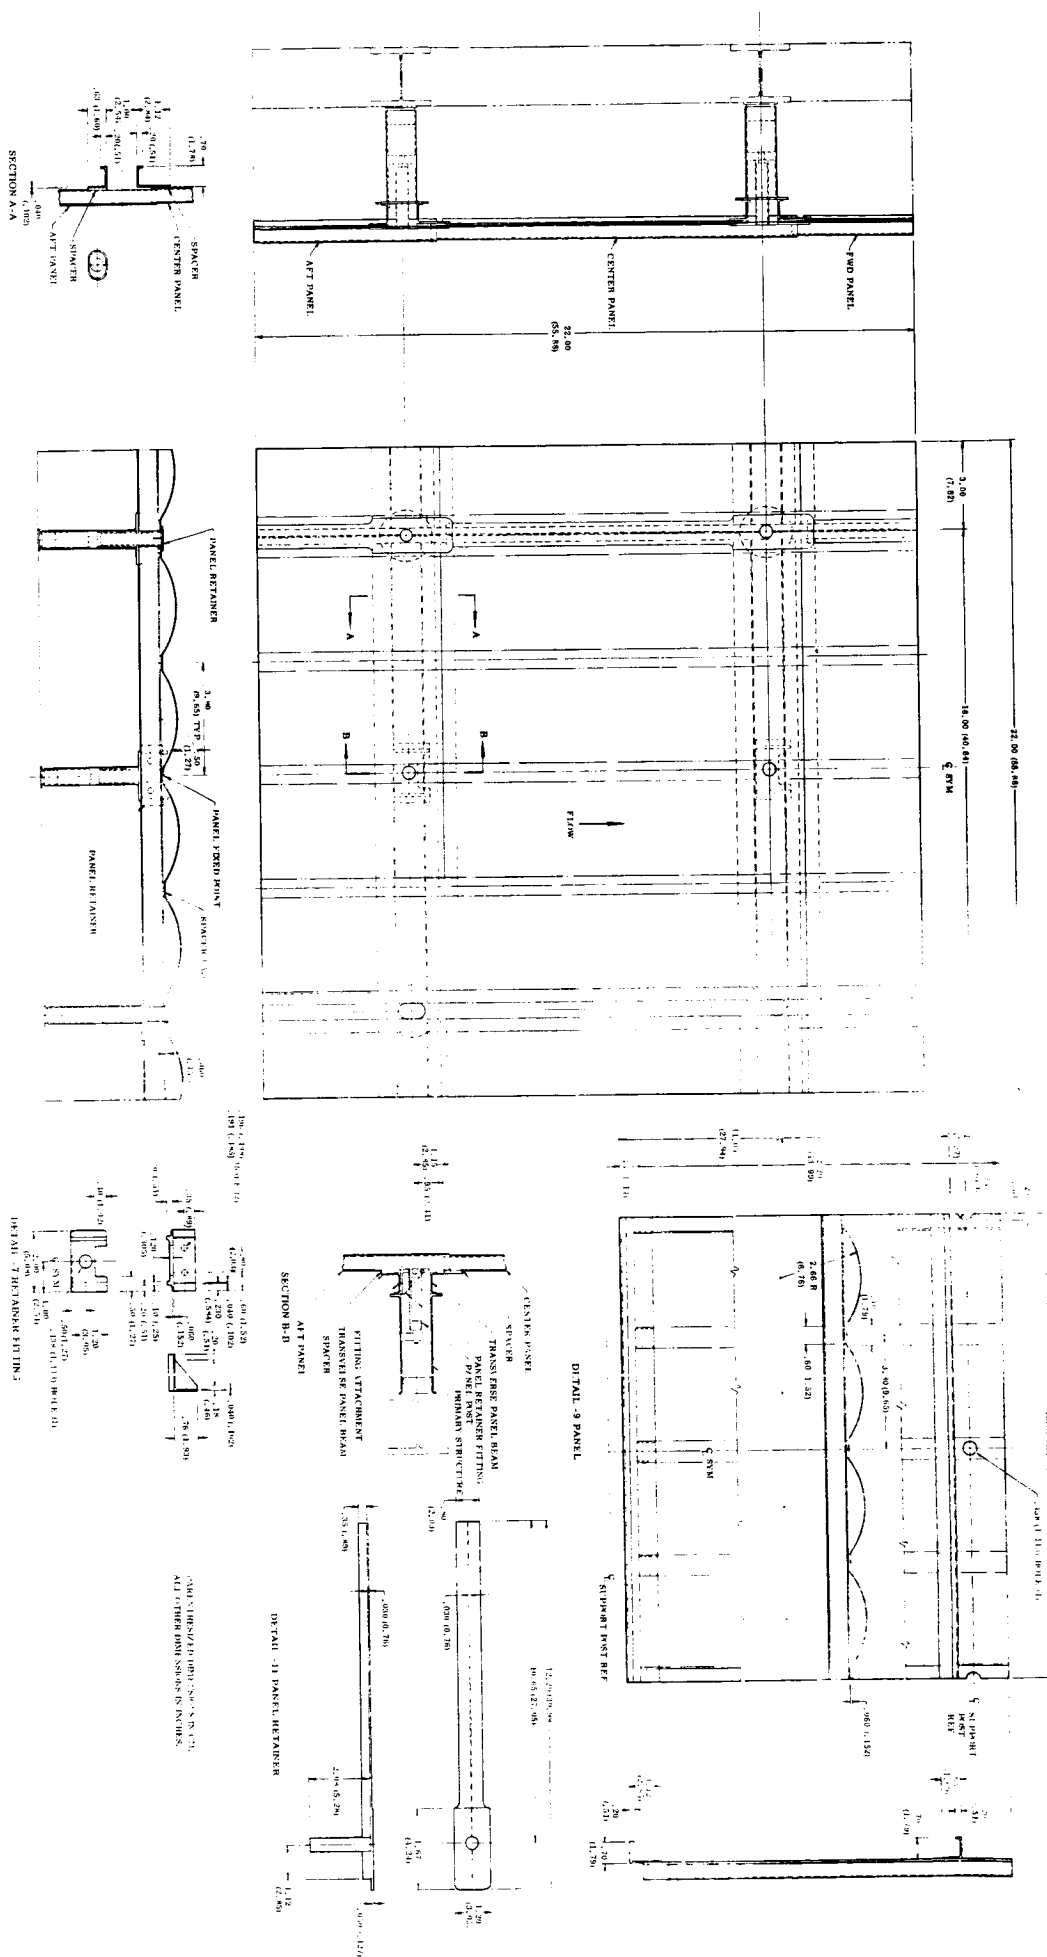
Preliminary Design of Corrugated Metal Shield Test Panel Assembly
